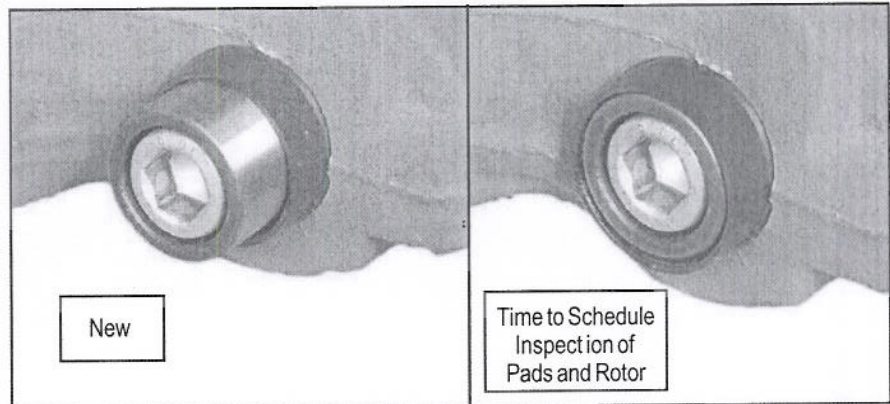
SOLID RUBBER BUSHING-STYLE WEAR INDICATOR INSPECTION
